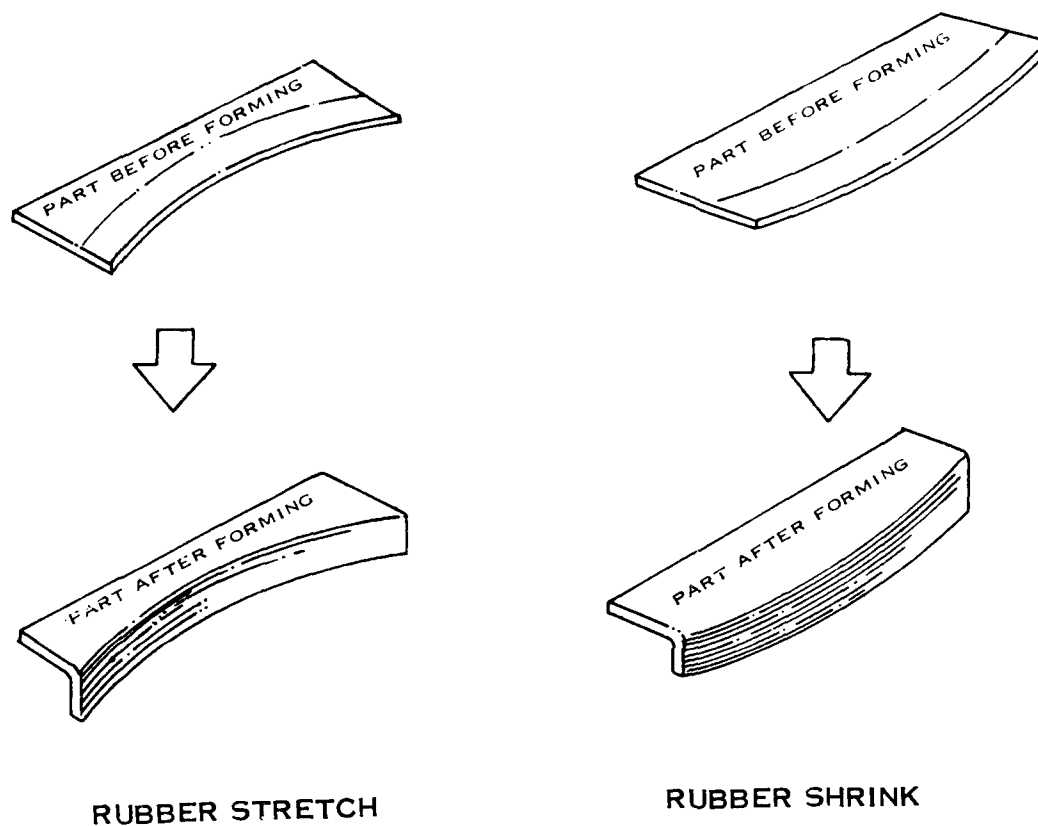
RUBBER FORMED STRETCH AND SHRINK FLANGE BLANKS AND RESULTING GOOD PARTS
